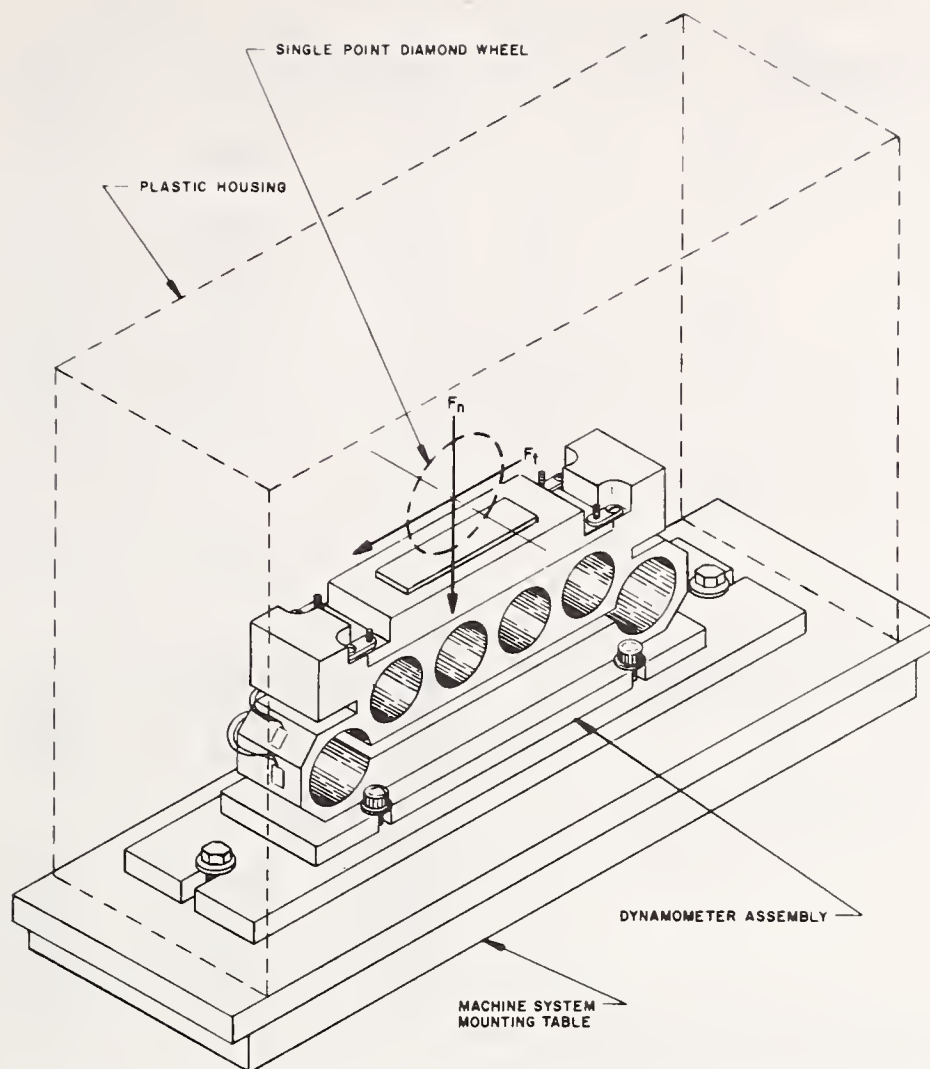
Two dimensional grinding dynamometer designed and used for the studies reported here.
